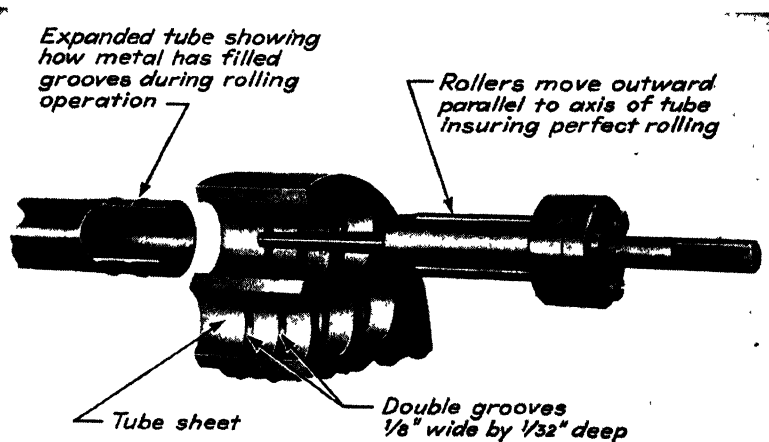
Method of expanding tubes into tube sheet. (Courtesy of the Ross Heater and Mfg. Co.)
